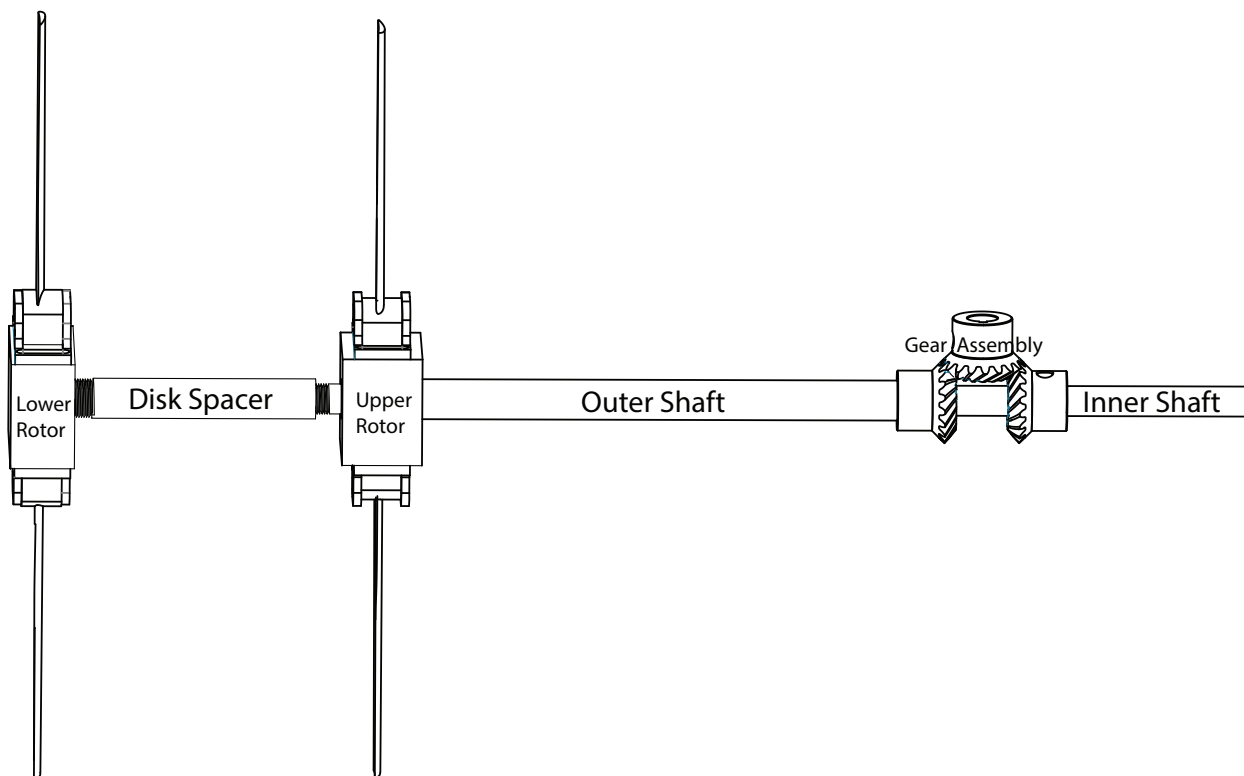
SolidWorks assembly of the coaxial rotor model
